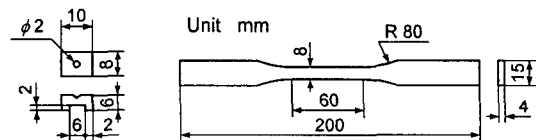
Shape and dimension of fretting fatigue specimen and bridge pad
